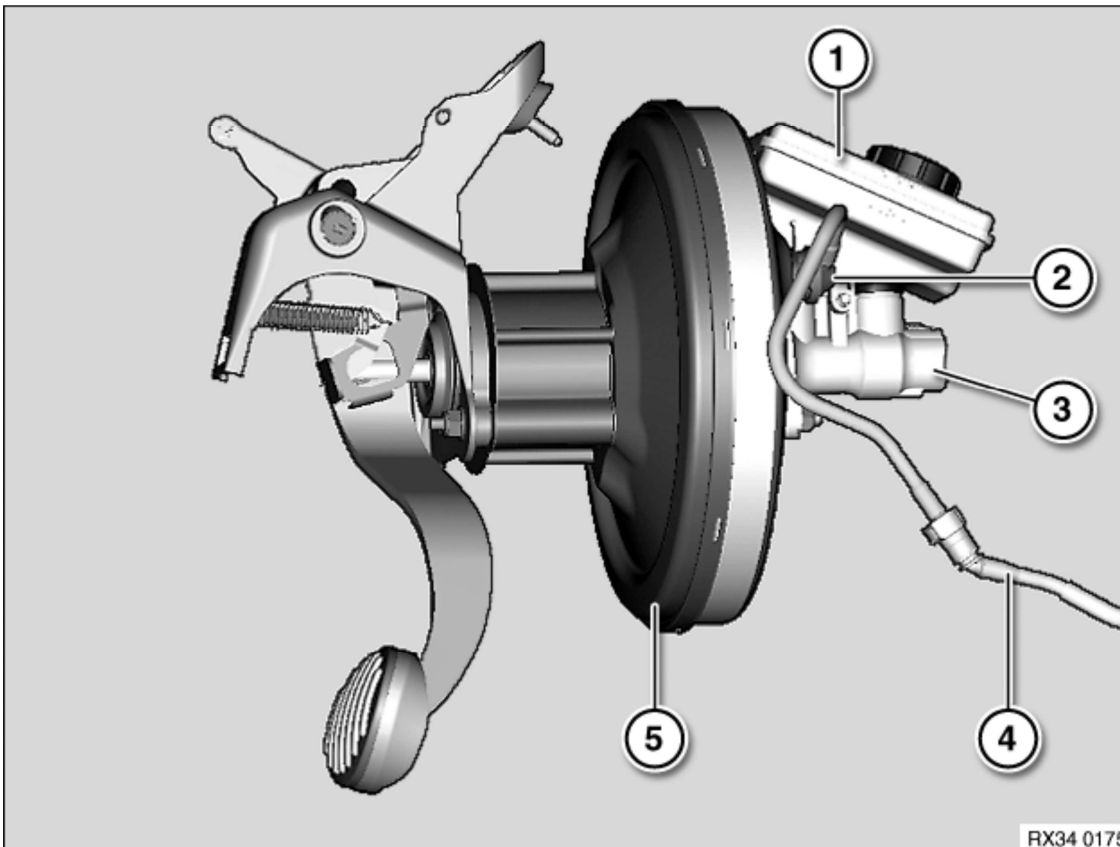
Identifying Brake Master Cylinder / Brake Booster
